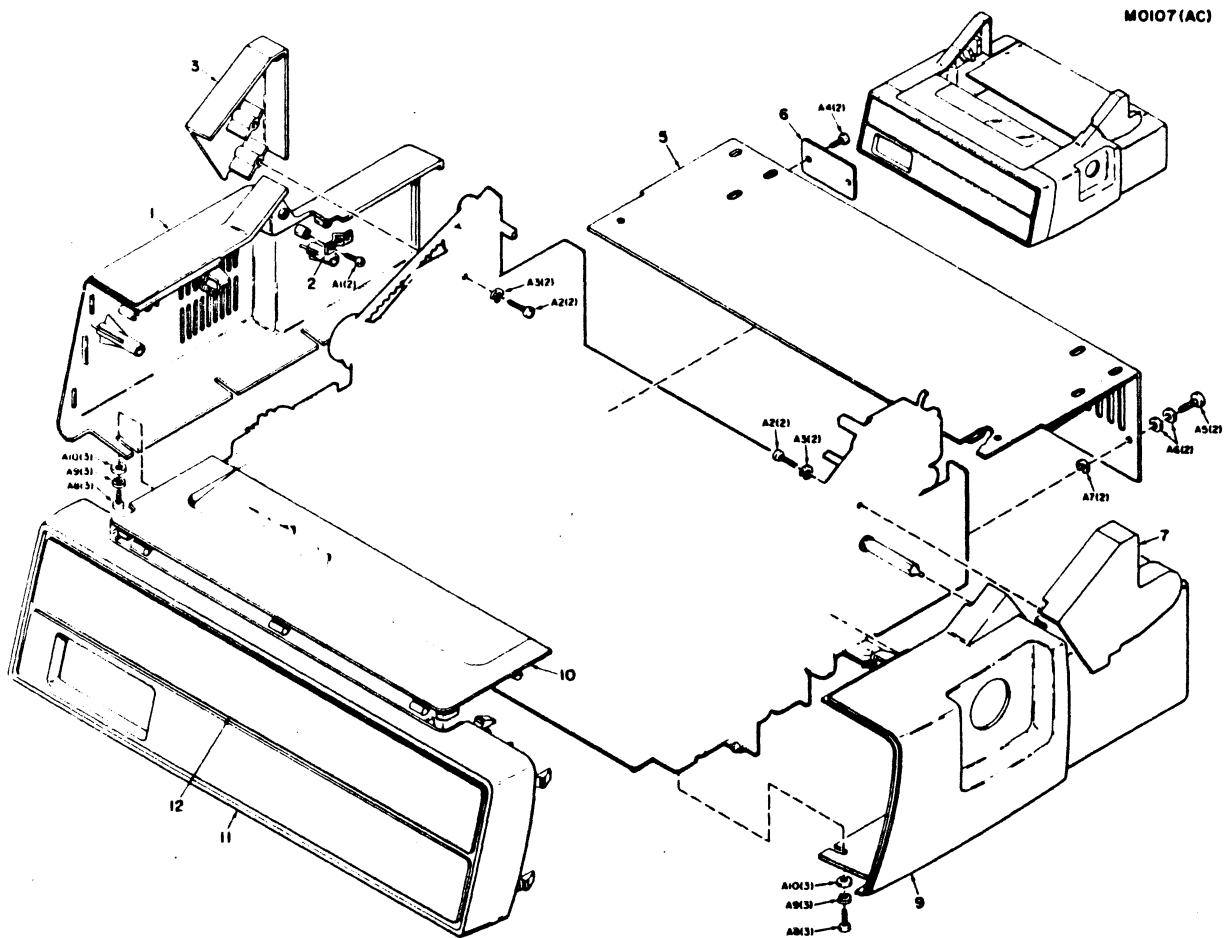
REMOVAL/REPLACEMENT, COVER ASSEMBLIES
